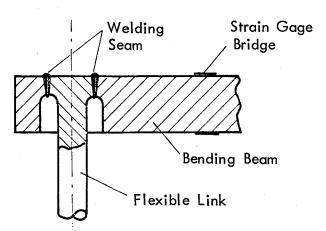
Welded connection of bending beam and flexible link.
